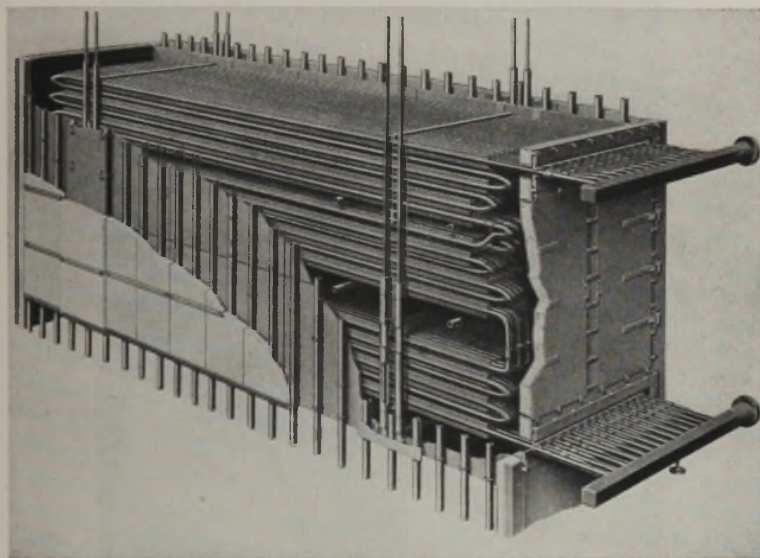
Arrangement of Type C Elesco economizer as installed within the boiler setting.
